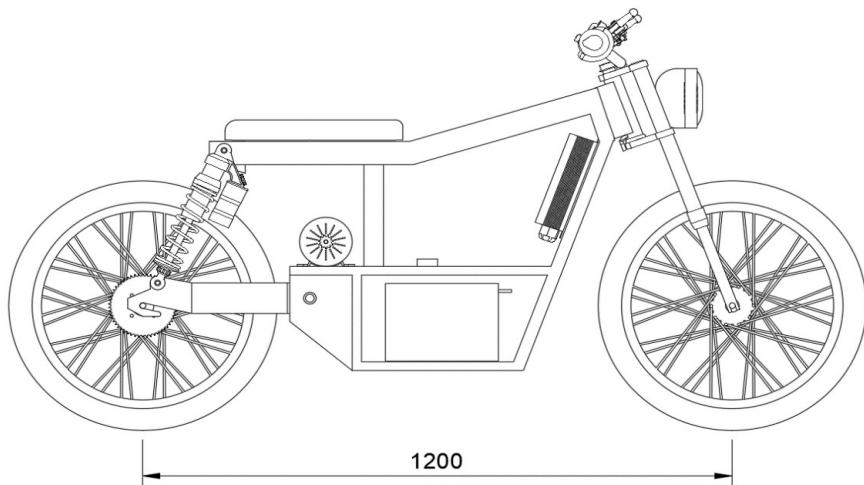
CAD Assembly of my motorcycle with wheelbase measurement
